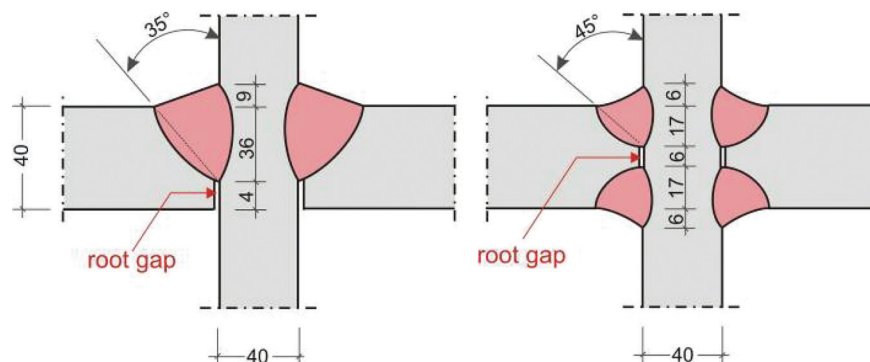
Butt welds with root gaps (dimensions in mm).
